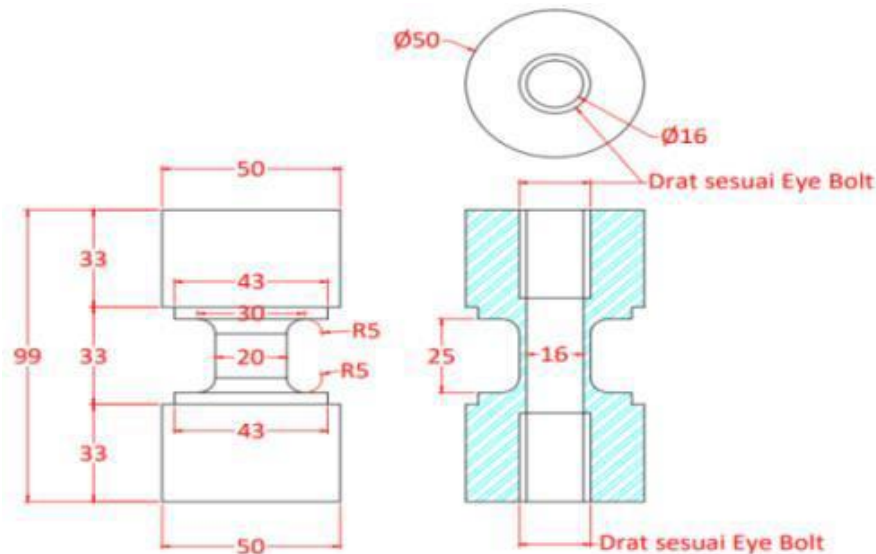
Dimensions of the load cell after adjusting to the eye bolt table.
